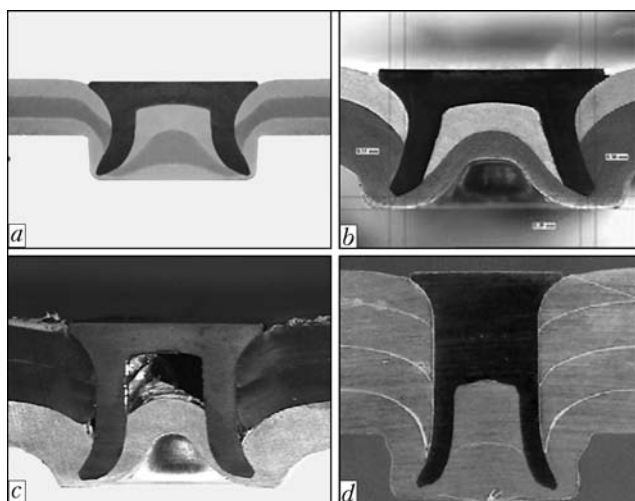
Punch riveting: a – Al-steel-Al; b – Al-steel; c – Al-plastics; d – Al-(1.5 + 2 + 2 + 2) mm
